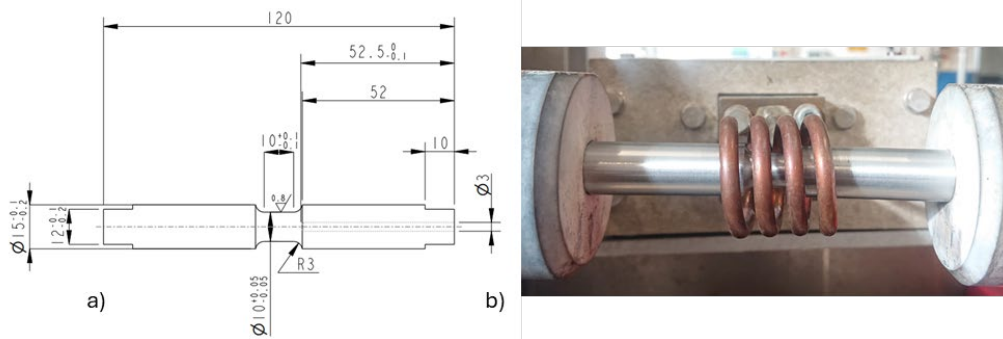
a) Geometry of the solid bar specimen, with dimensions (in mm); b) Pictures of an AA6082 sample during the hot torsion test performed at the University of Bologna - Department of Industrial Engineering.
